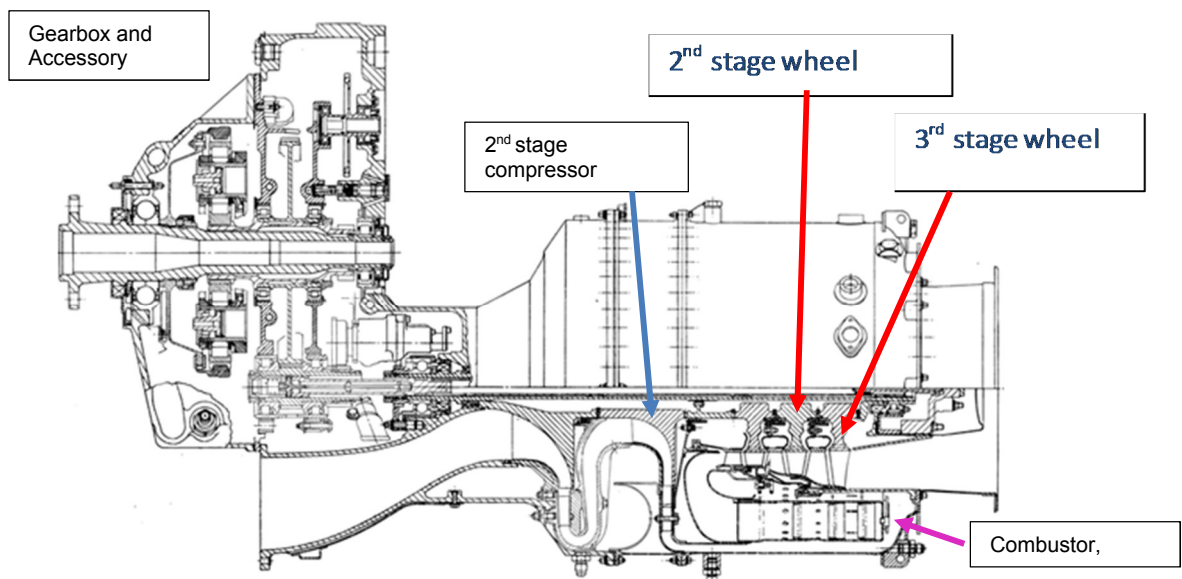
Layout of the damage to the parts of the engine (source Honeywell)
